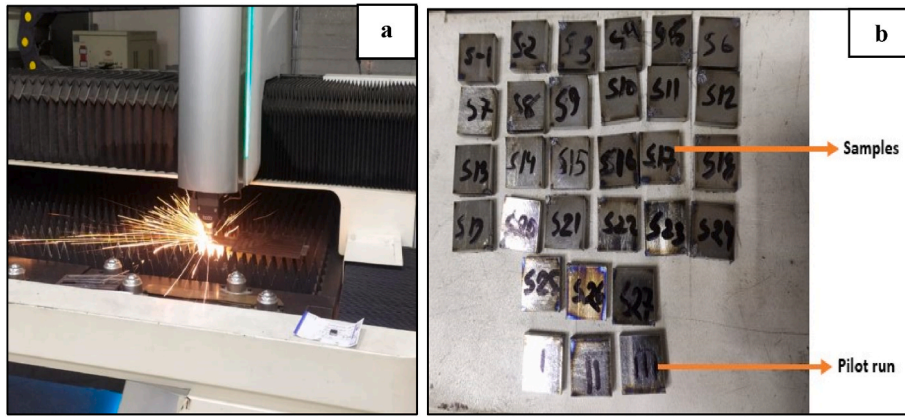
(a) Machining of the P20 sheet and (b) P20 samples after machining.
